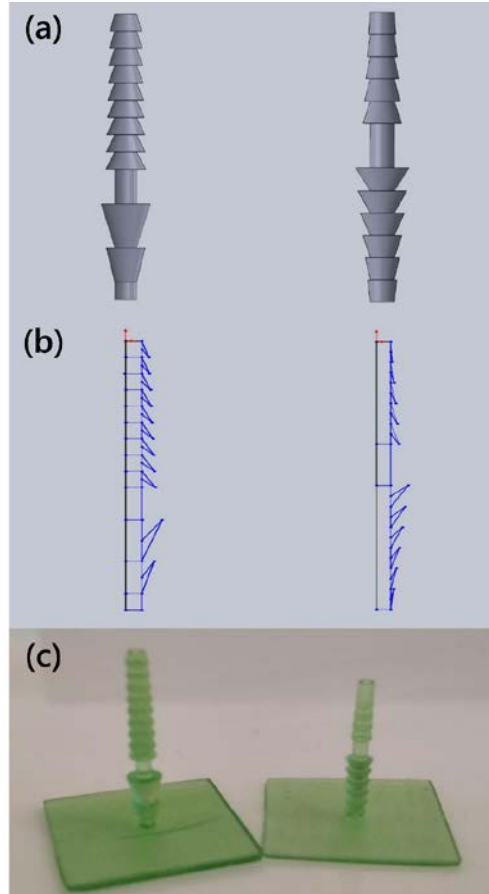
a) 3D design and b) 2D sketch of connectors, and c) fabricated connectors using 3D printing method
